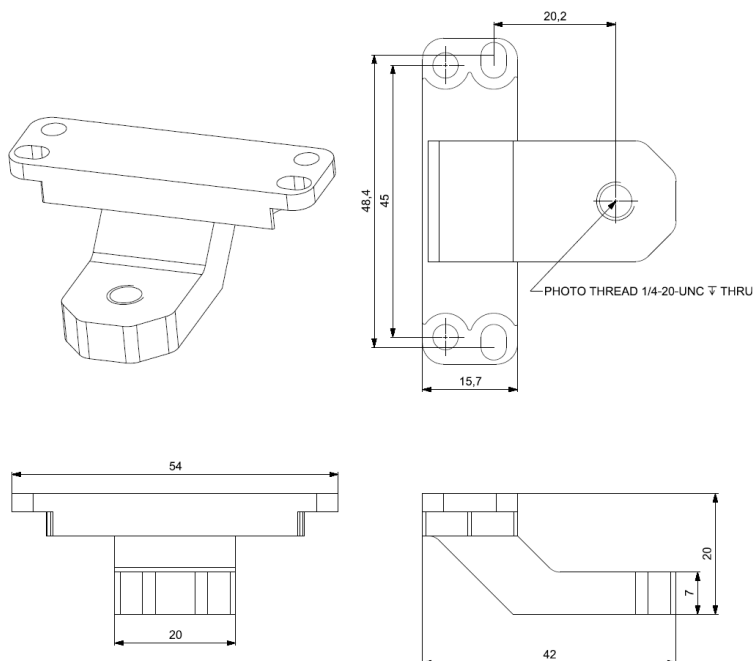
, MECH-60MM-BRACKET-T, dimensional drawing
